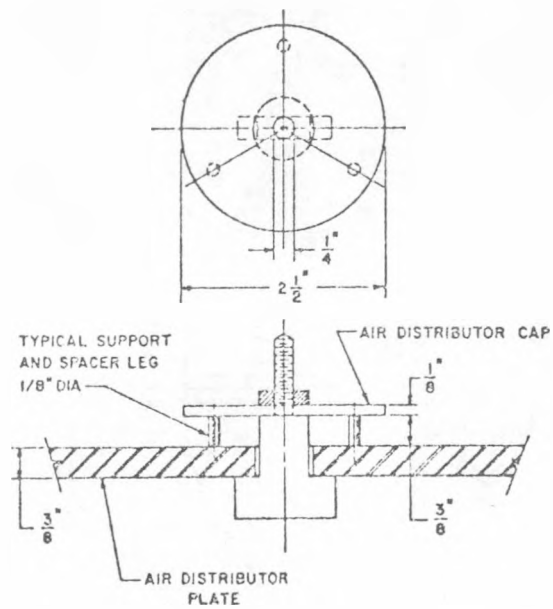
Air Distributor Cap Assembly Installed Prior to Run 5
